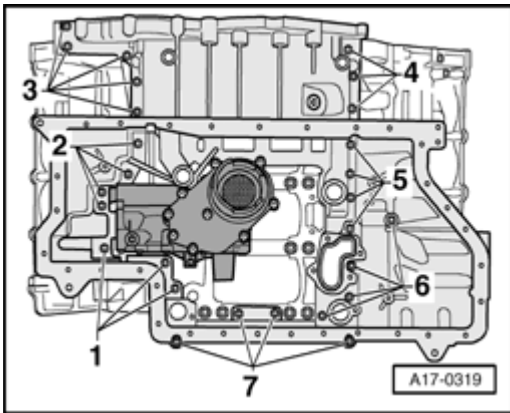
Removing/Installing Bolts For Upper Section Of Oil Pan
